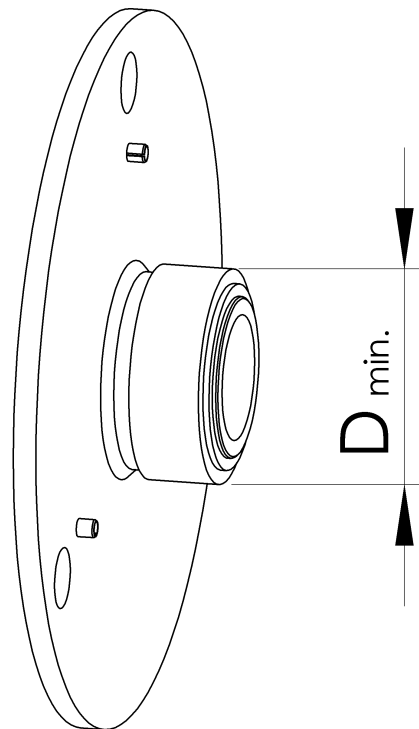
Check the outer diameter of the Textar-bearing (design GZ)
